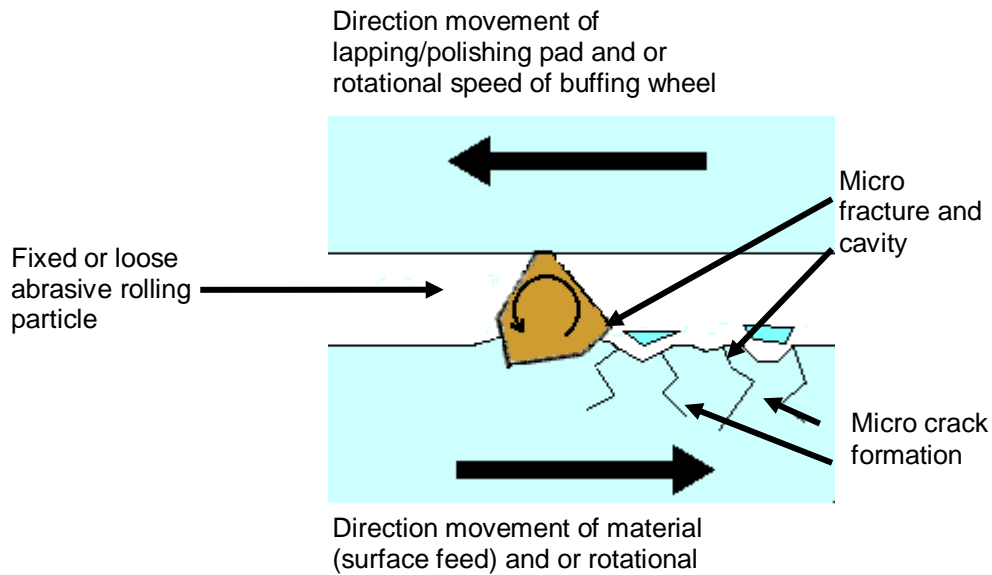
Rolling Grit causing micro fractures and cracking on the surface
